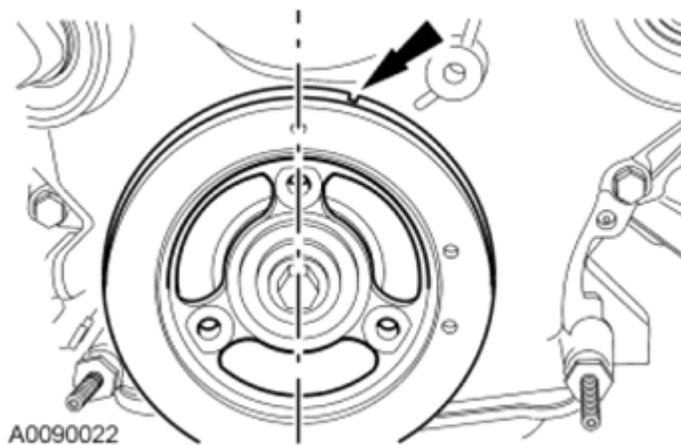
Positioning Crankshaft Damper Spoke At 12 O'clock Position
